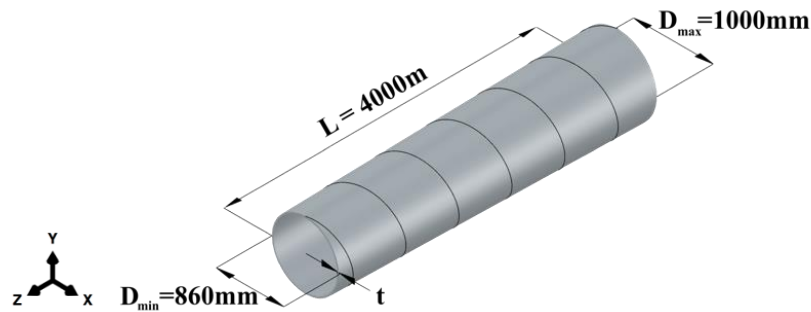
Spirally welded tube parametric model dimensions.
